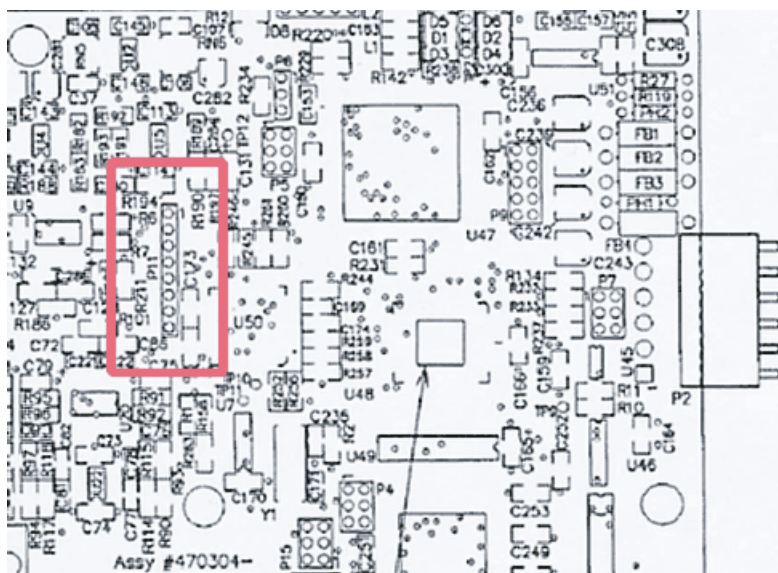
Locate and remove solder from the eight pads at P11 (inside the rectangle). The component side of the rear panel PCB is shown.
